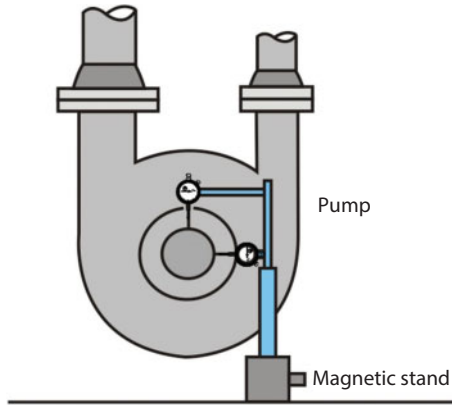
One method to check for excessive pipe strain on equipment is with dial indicators while the pipe to equipment flange is being made and bolts torqued.
